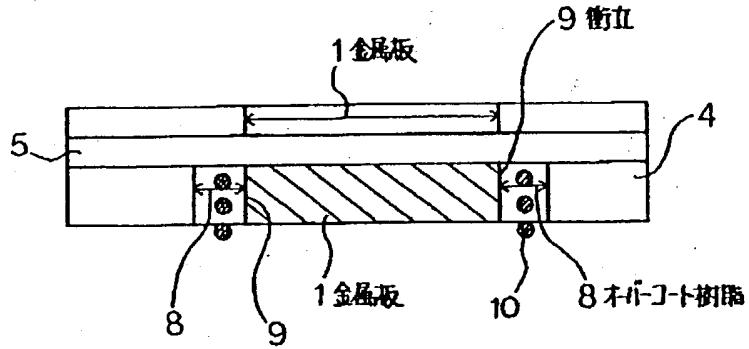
Explanatory drawing of this invention method which shows a screen position.
